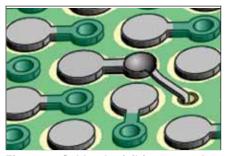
Solder the foil jumper to the plated hole connected to the BGA pad.
